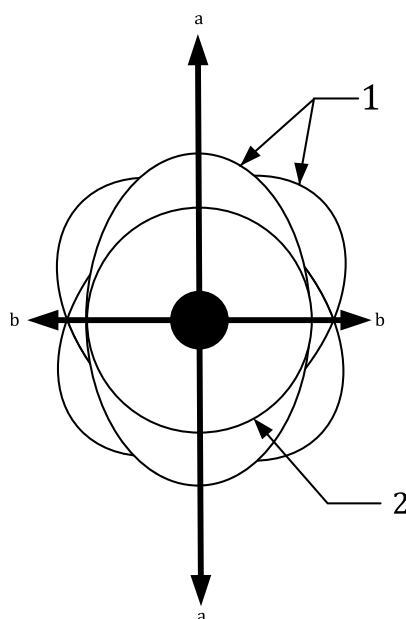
Example of a calibrated upper thread plug gauge (thread failed)
